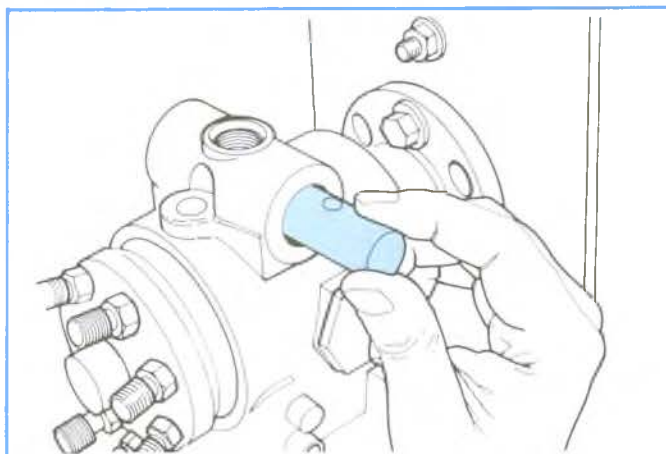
, Installing the Advance Piston on Mechanical Light Load Pump.
